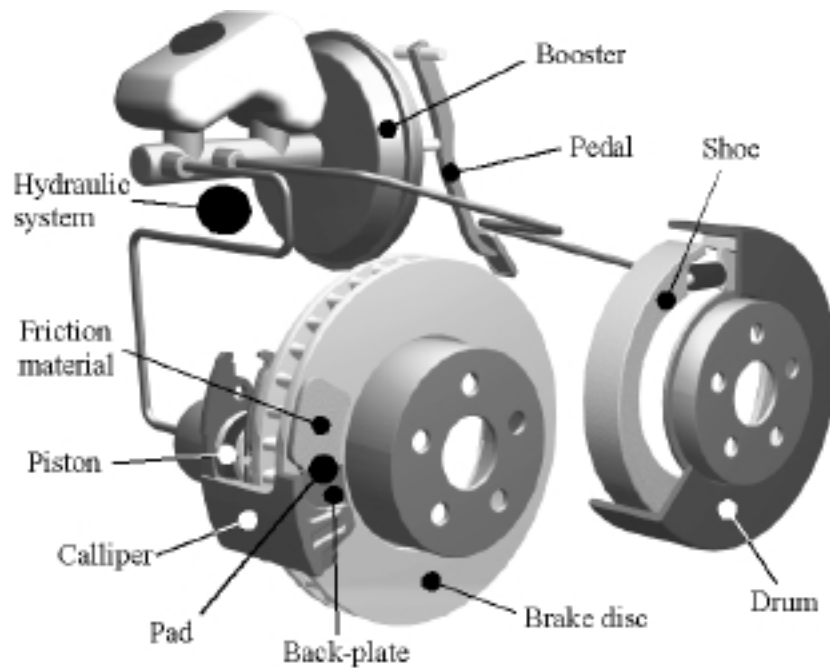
Illustration of the two brake systems dominating the market, the disc brake and the drum brake. The brake drum and the calliper have been cut open to reveal the pads and shoes. The friction material is cast onto the back-plate, forming the pad. (Karl Åstrand /FZ)
